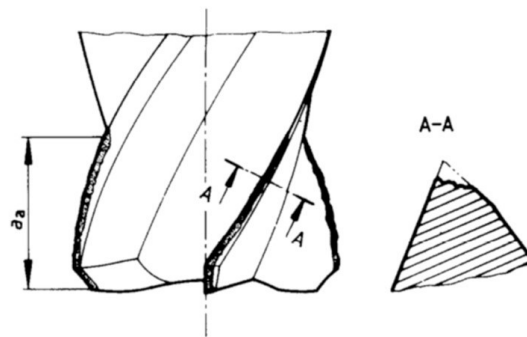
The uniform flank wear is the most expected tool wear [25].
